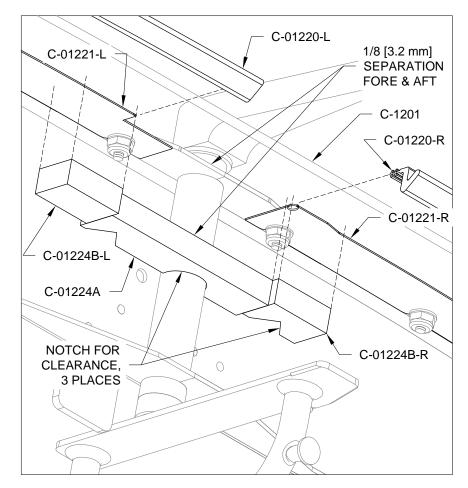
SEAL RETAINER & ROLL BAR SEAL INSTALLATION
